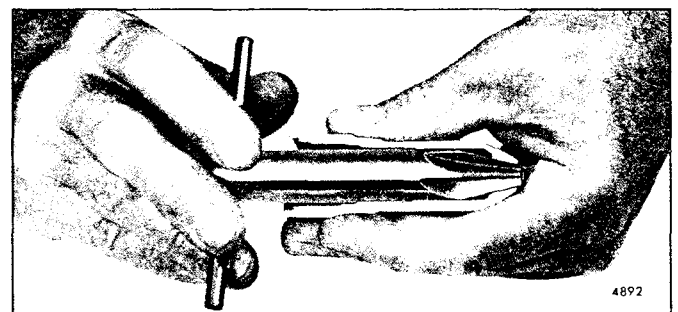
Cleaning Injector Nut Lower End with Tool J 9418-5
